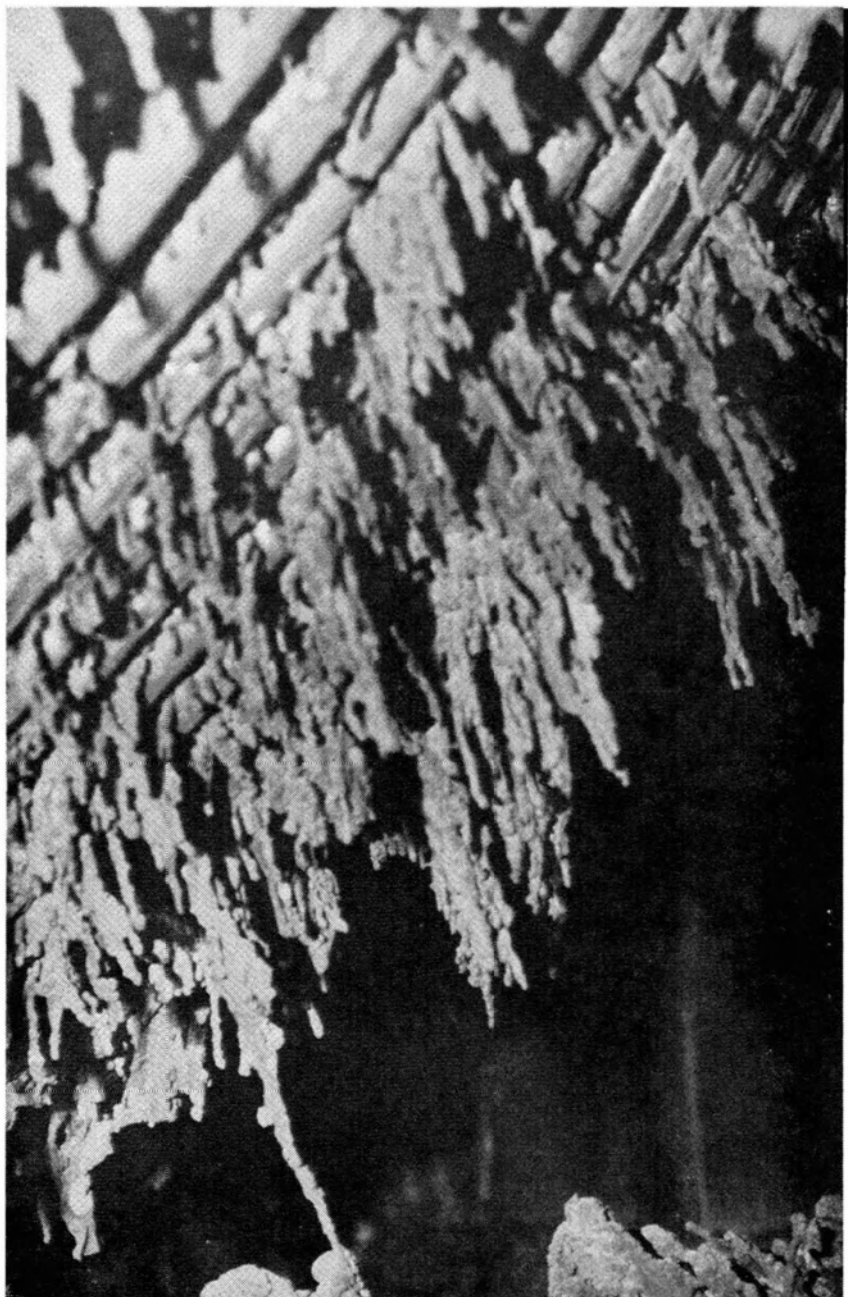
VIEW OF TUBES SHOWING HOW METAL HAS MELTED AND SOLIDIFIED
